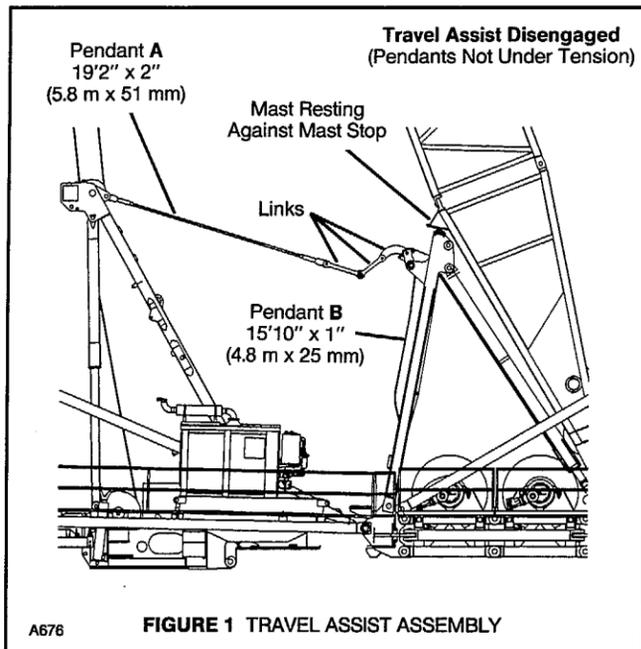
TRAVEL ASSIST ASSEMBLY
